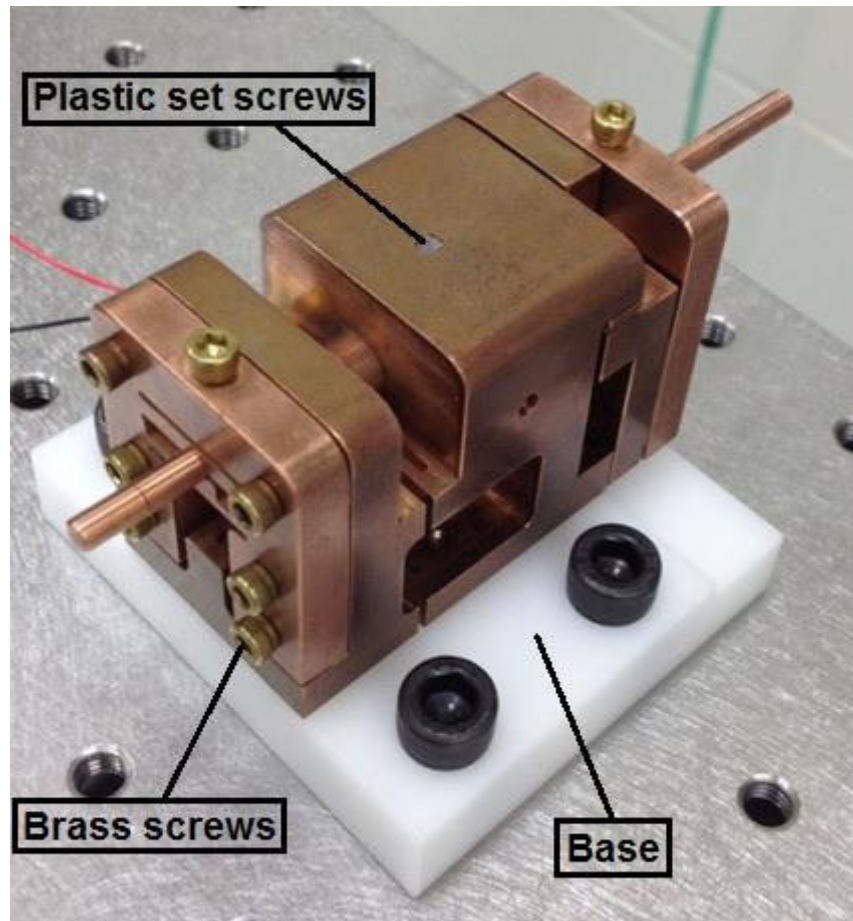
Picture of the fabricated prototype showing copper alloy parts and plastic base
